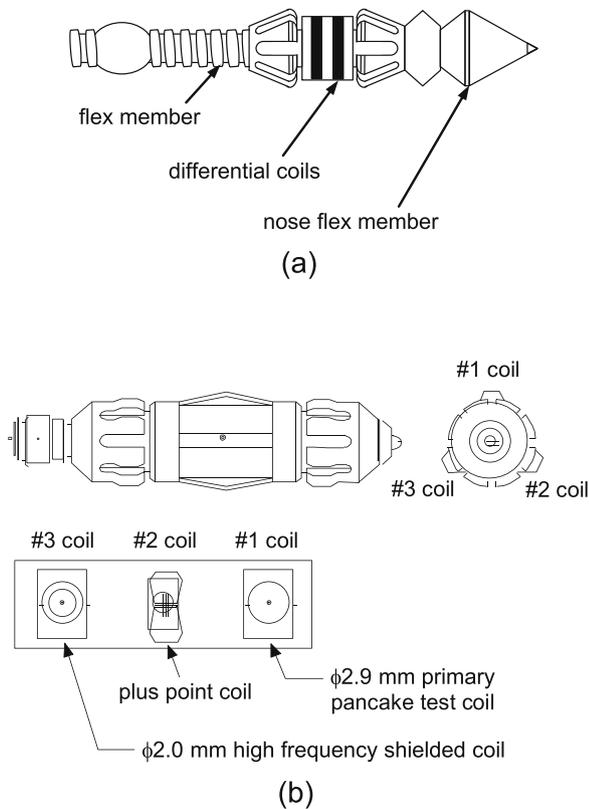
Schematic of (a) a bobbin probe and (b) a 3-coil motorized rotating probe.
